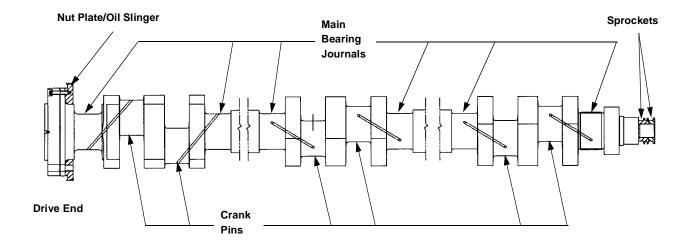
CRANKSHAFT - TYPICAL FLANGE (JGE/6)
